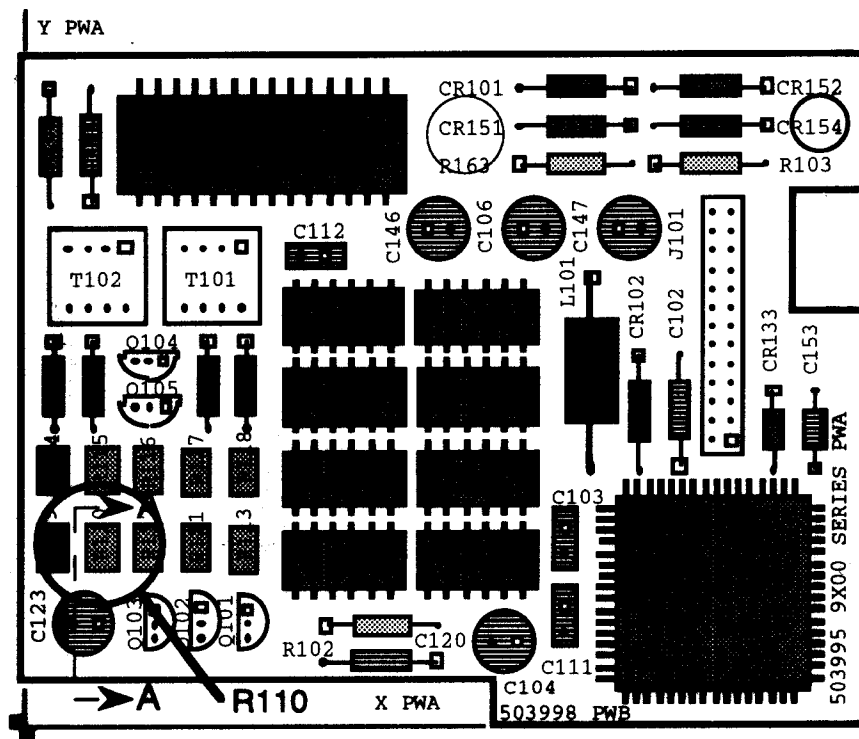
Sample Printed Wiring Assembly (PWA)
